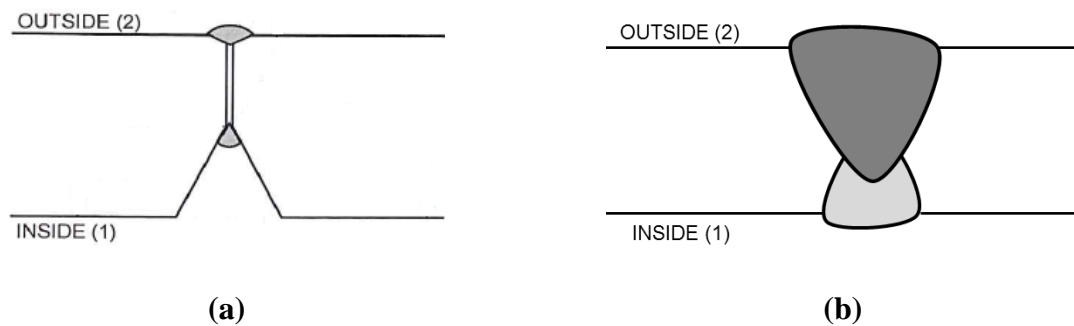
(a) Edge preparation of the welding sequence with inside/outside tack welds milled out (b) weld run sequence
